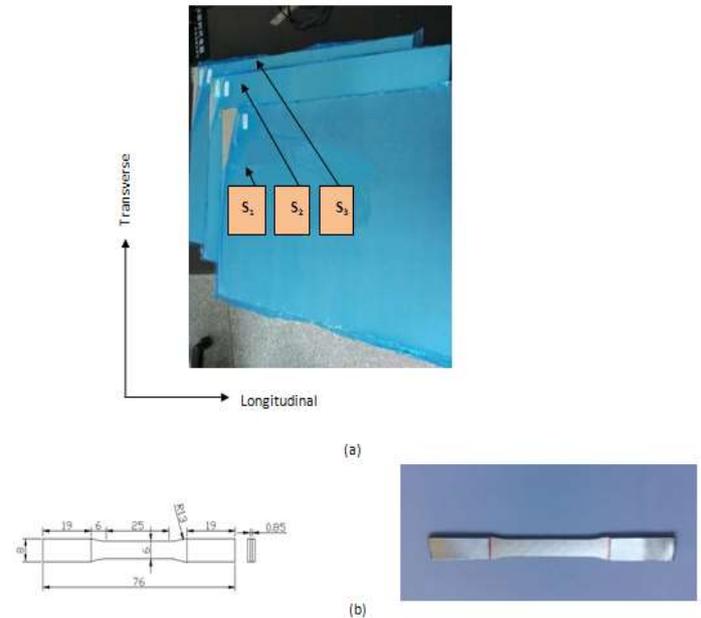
(a) Three samples composite sheets, (b) Tensile test specimen of composite material in both directions (all dimension in mm)
